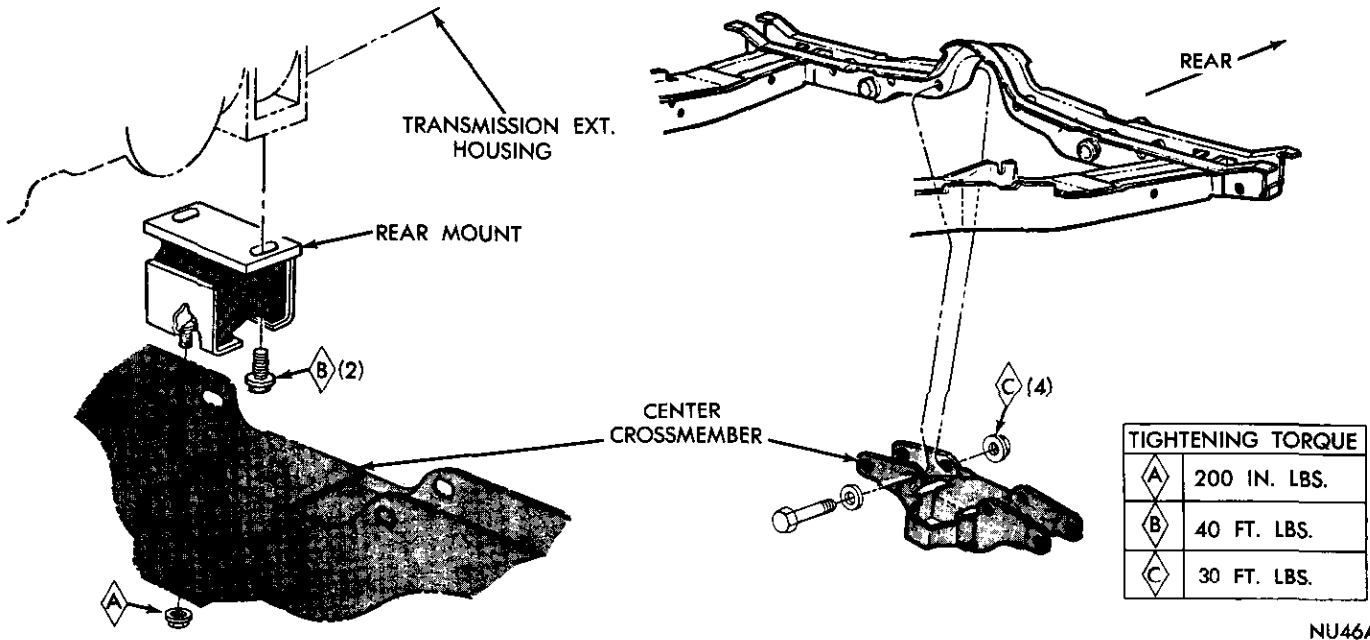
Center Crossmember and Rear Engine Mount (Coronet/Charger)
